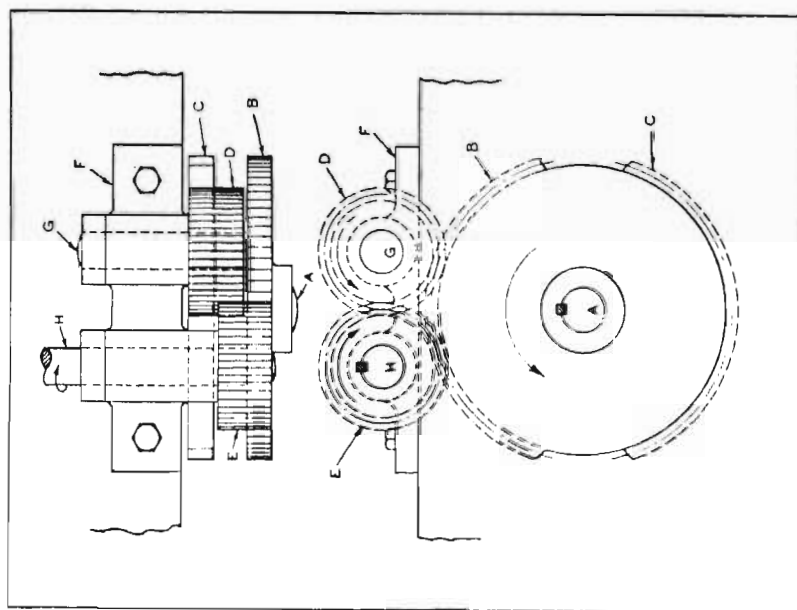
Mechanism for Reversing Carriage Traversing Screw Shown with Driving Shaft A Rotating Driven Shaft H in Clockwise Direction.
